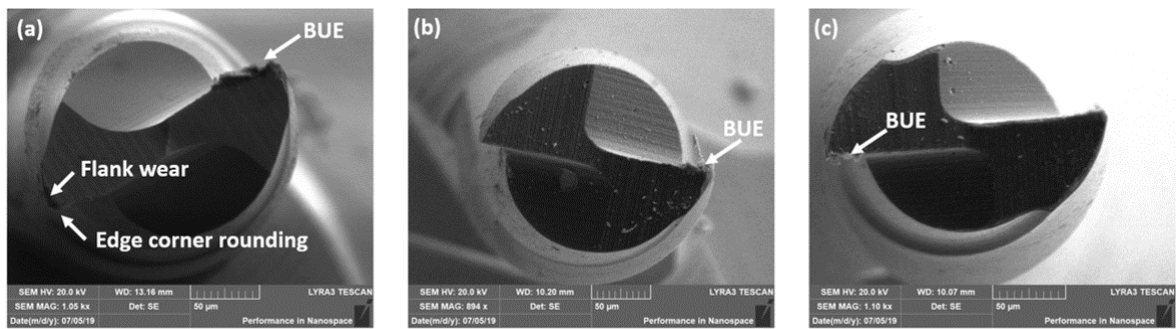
SEM imaging of tools after machining: (a) Uncoated tool (b) UT coated tool (c) HM coated tool
